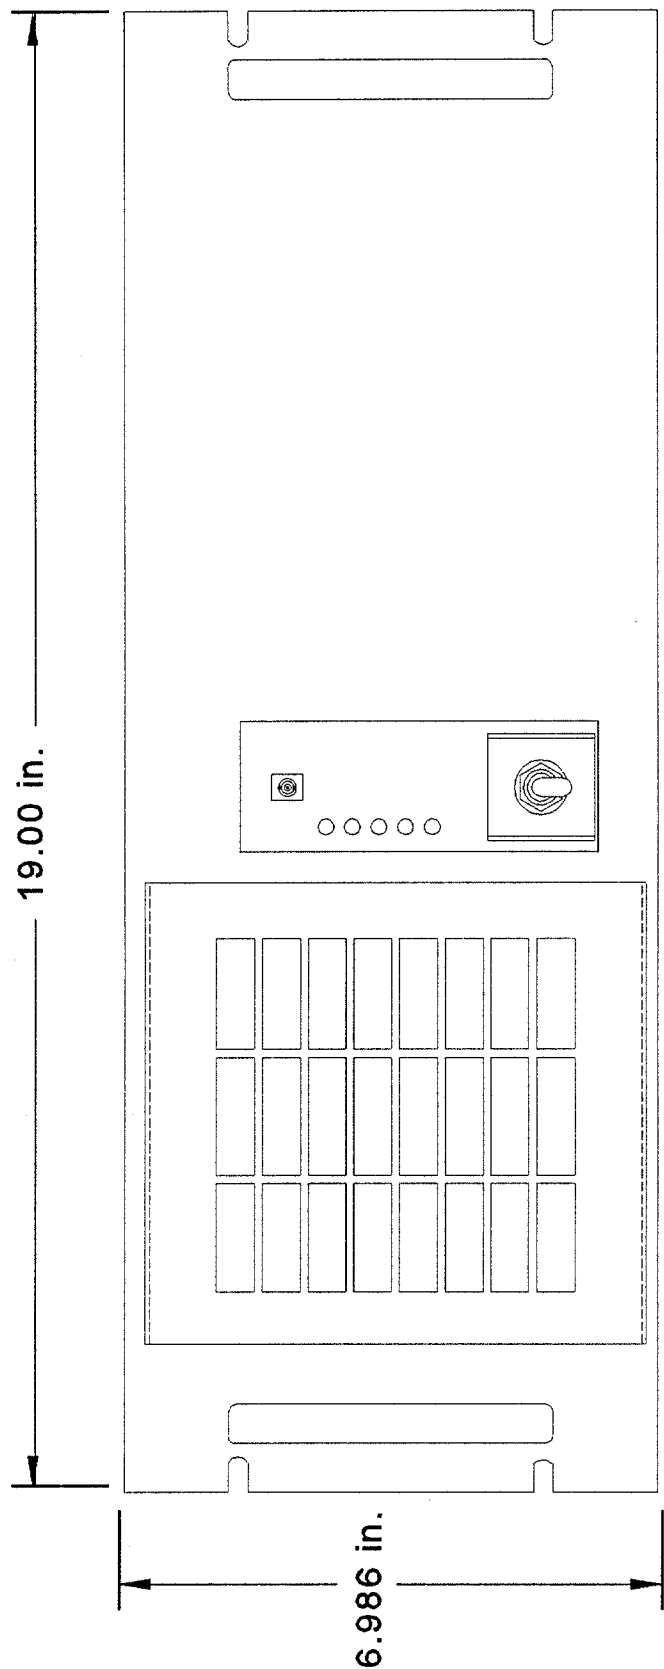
GUPS 1250A (Front View) Mounting Dimensions
